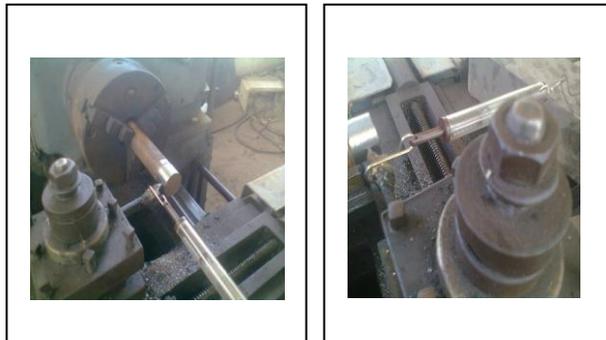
Dry orthogonal turning of mild steel sample and cutting force measurement on tool using dynamometer [7]
